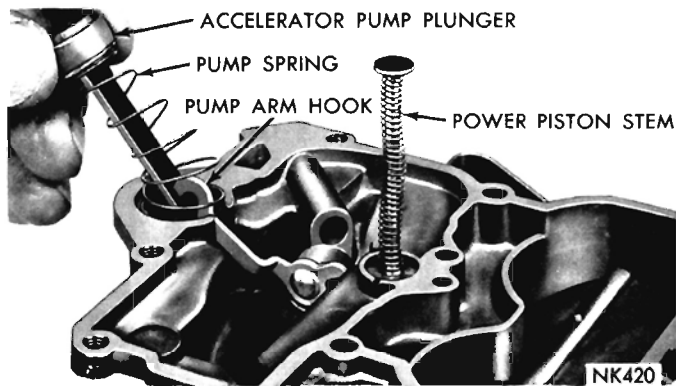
Removing or Installing the Accelerator Pump Plunger
